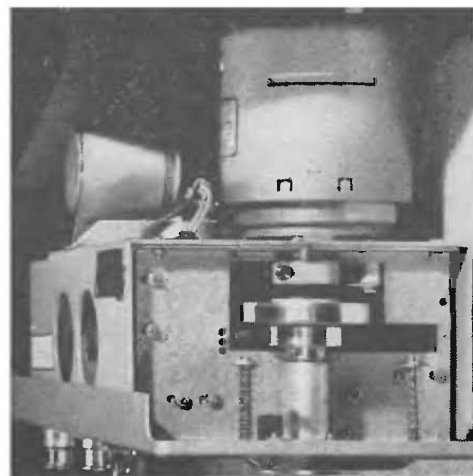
Take-up assembly of Magnecorder, showing the clutch with the knurled split adjustment nut at the end of the shaft.
